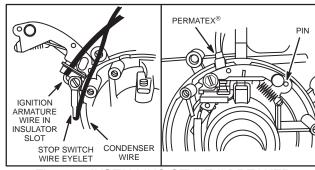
INSTALLING STYLE II BREAKER POINTS
